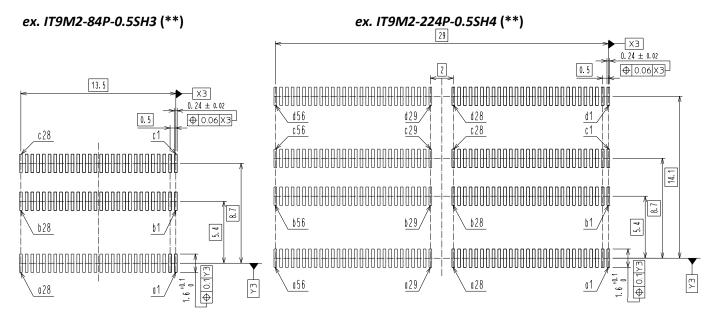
Plug Stencil Patterns (dimensions in mm)
